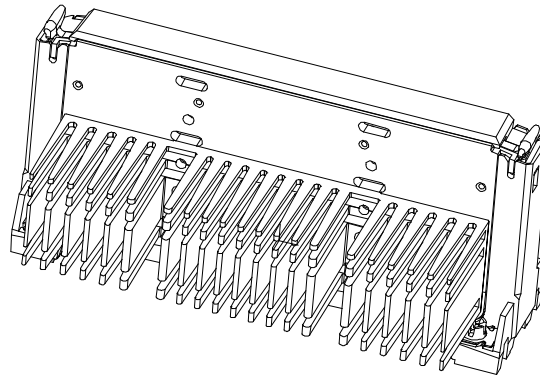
Fan Duct Insertion into the Chassis Assembly.
